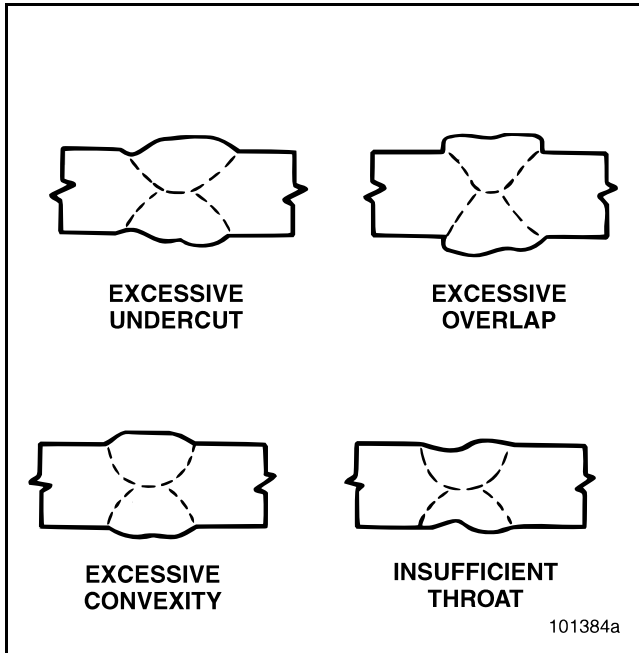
Unacceptable Butt Weld Profiles
